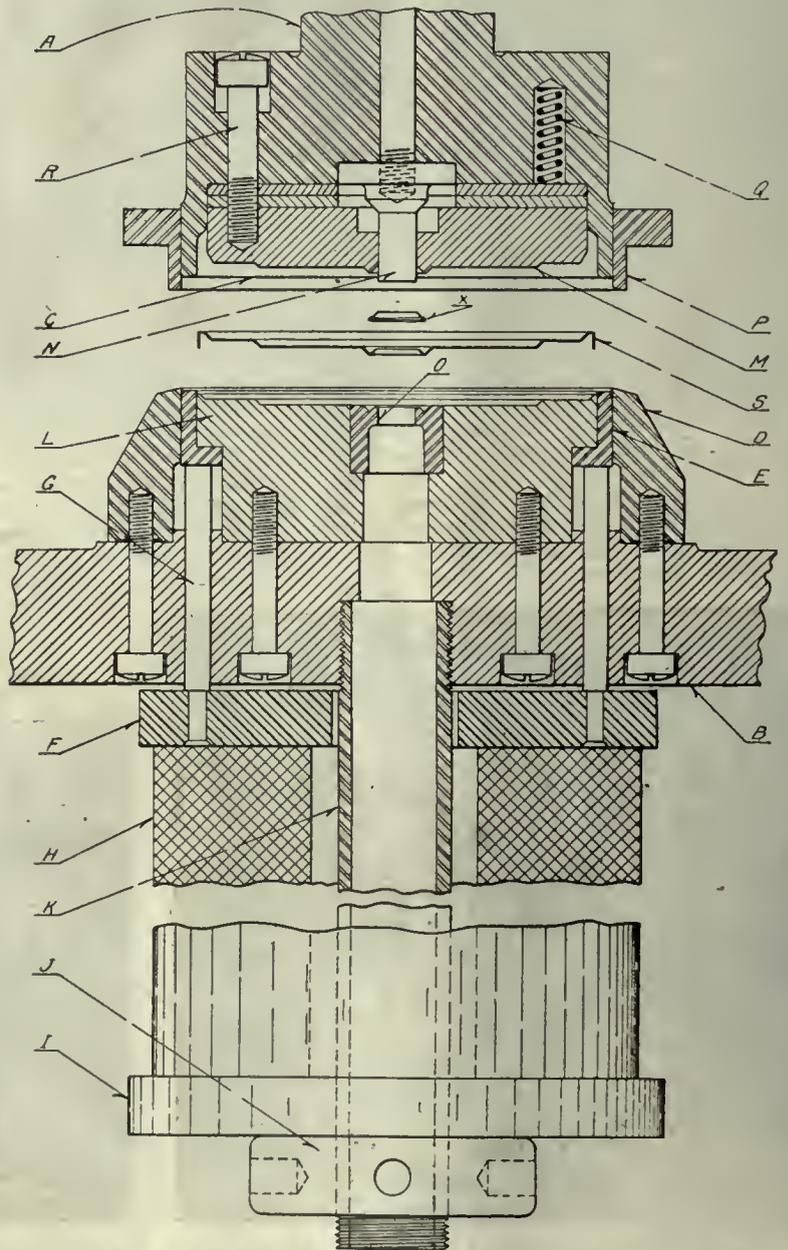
COMMON METHOD OF MAKING PUNCH AND DIE CAN COVERS.
